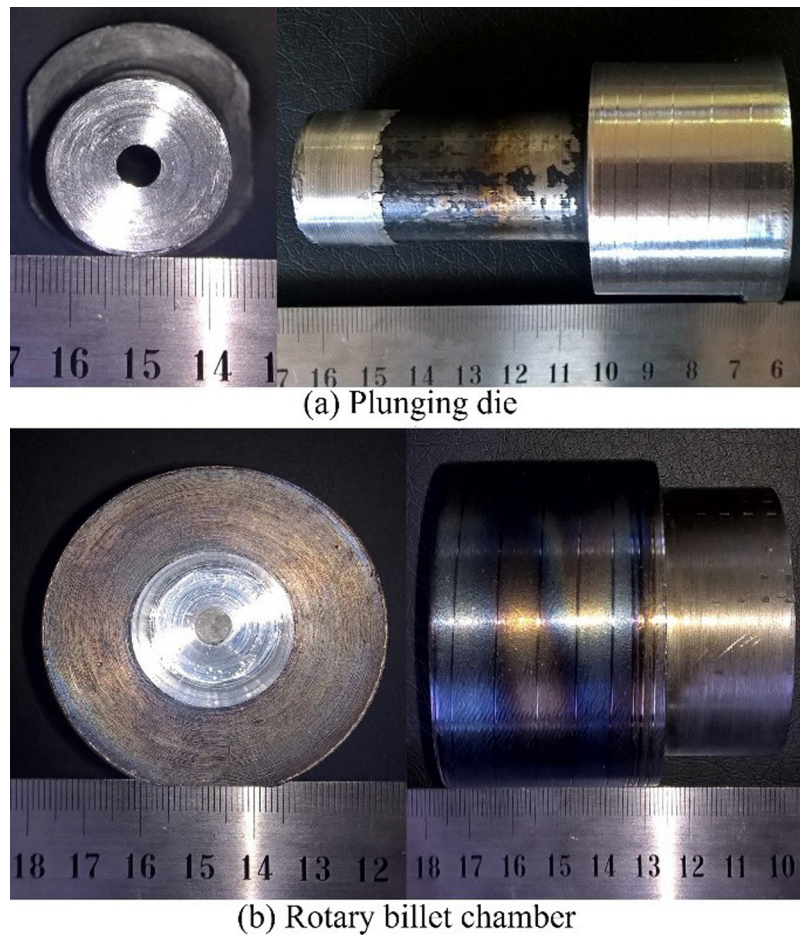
Friction stir extrusion instruments (a) plunging die (b) rotary billet chamber.
